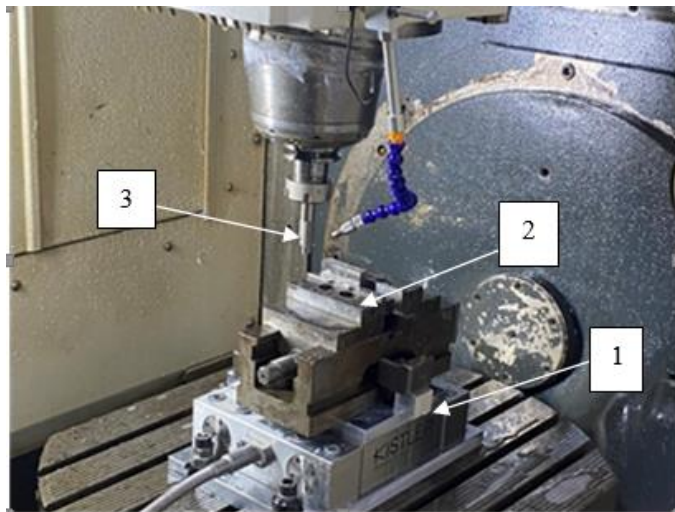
1. Force measuring device(9257B), 2. Workpiece, 3. Nozzle MQL, 4. Cutting tools.
